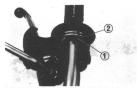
1) Throttle cable end 2) Grip pipe
